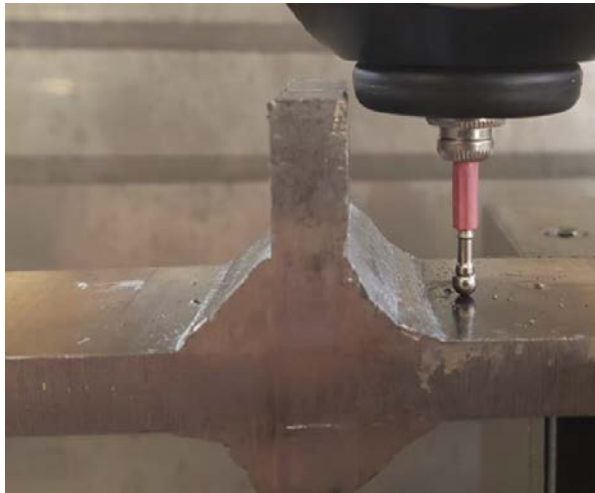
The measurement point A' beyond the weld toe on ADI side
